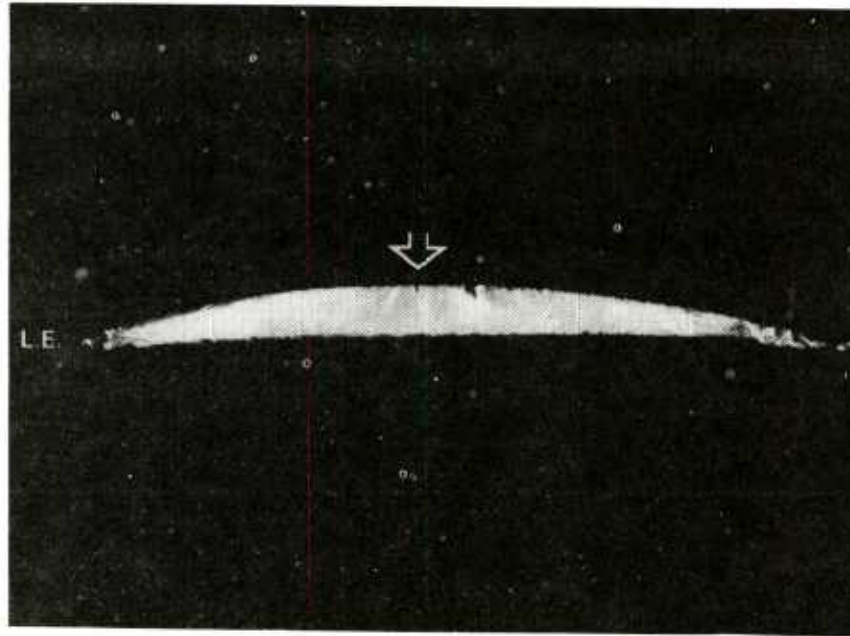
Overall View of a Typical Fatigue Fracture (arrow at origin).
